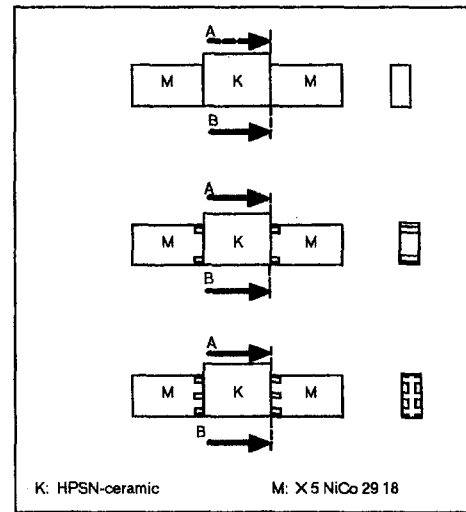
Ceramic-metal specimens for shear testing with grooves in the metal joint face
